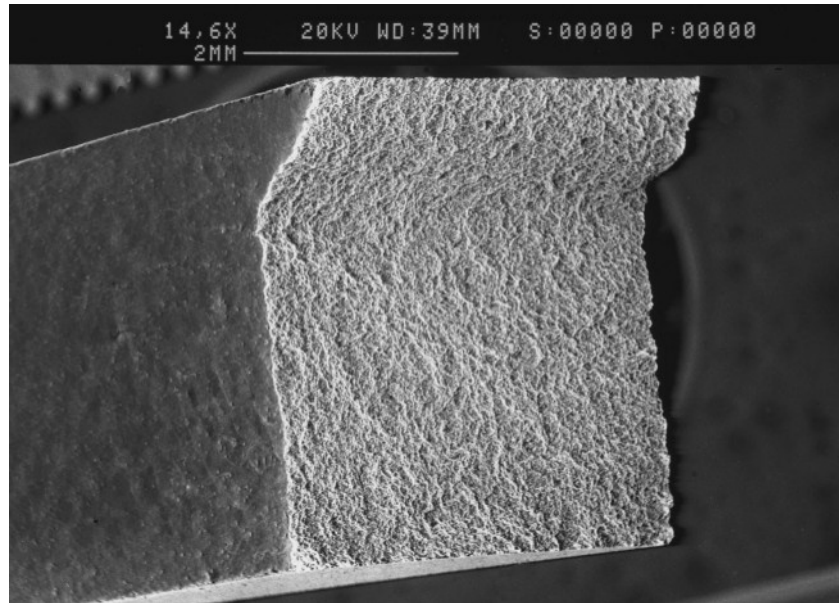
SEM image of an R4340 E specimen after failure under 4-point loading (left hand side of specimen).
